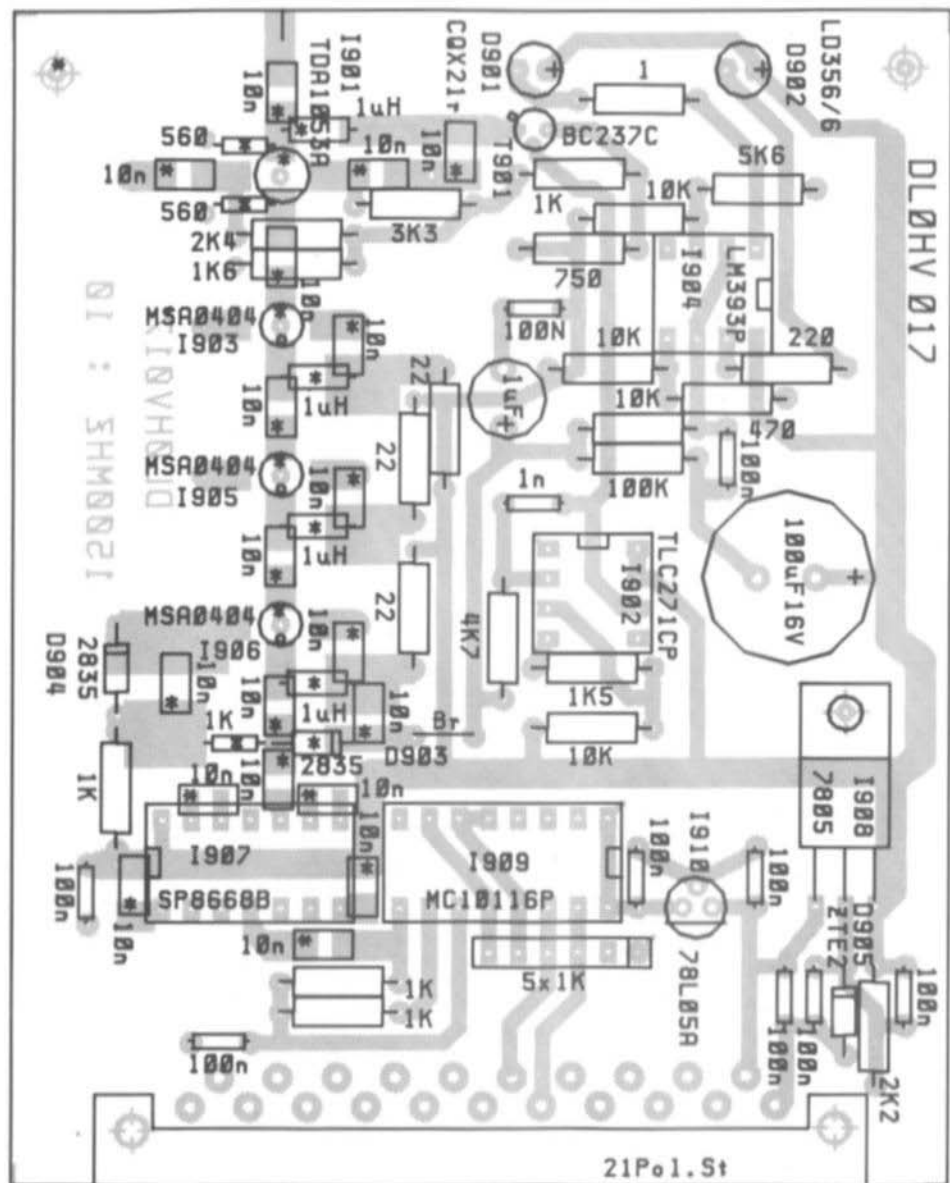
The PCB is double-sided and is through-plated manually in certain places
